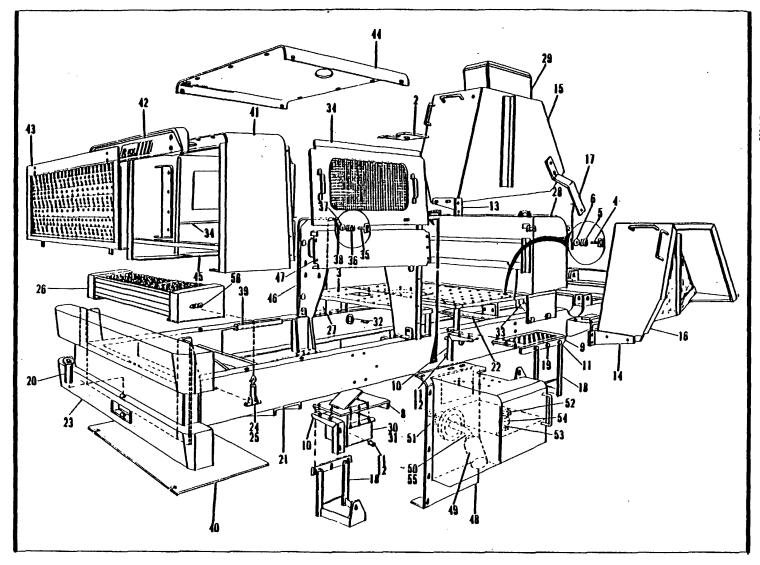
MAIN FRAME, ENGINE HOUSE, FLOORBOARD AND FENDERS.
